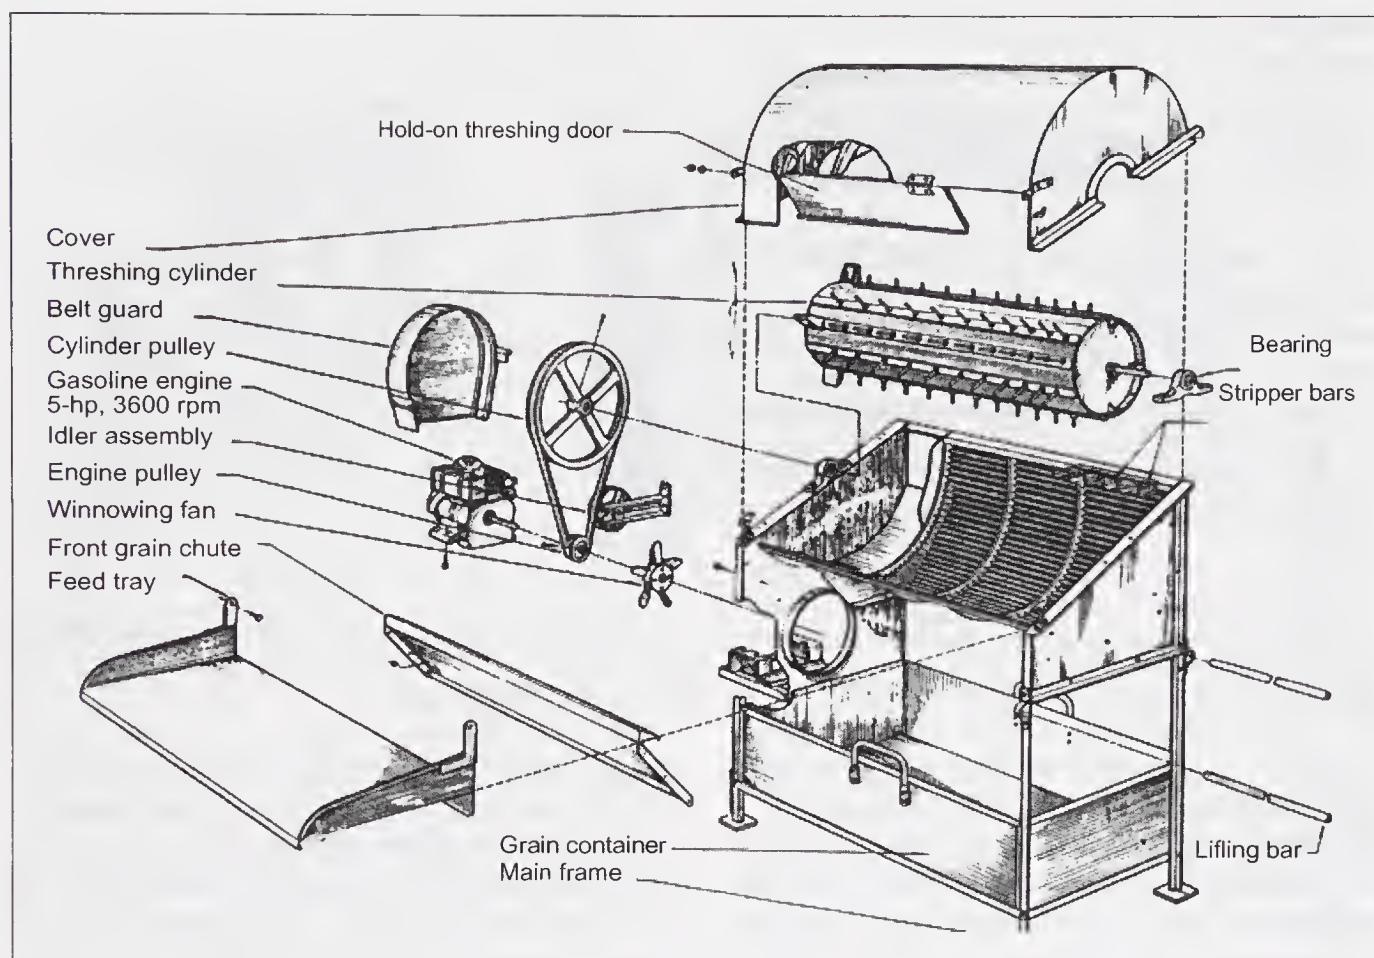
Exploded drawing of IRRI portable thresher TH-6.
